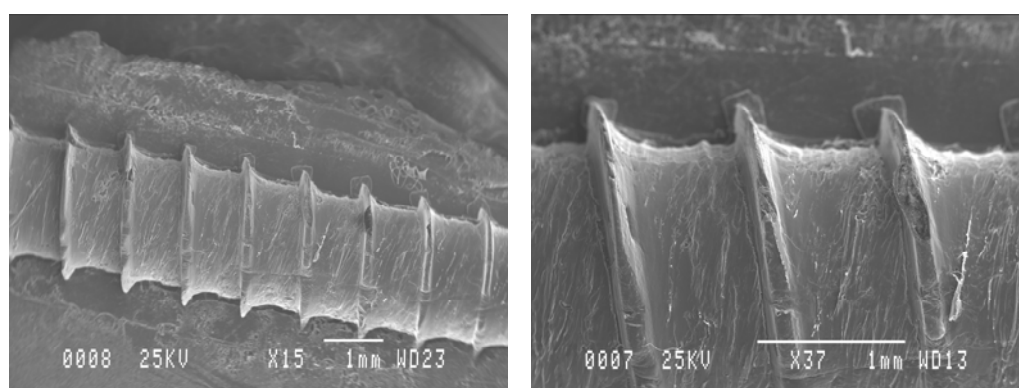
Screw fabricated from mould designed to specifications detailed above following screw threads in fig. 19 (above).
